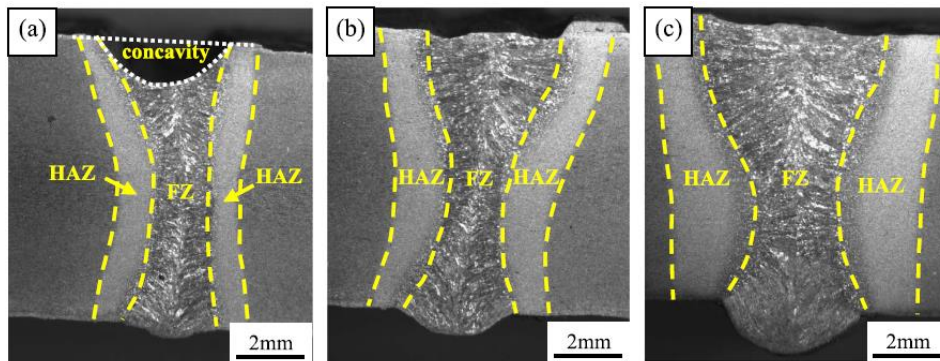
Macrographs of welds at different heat input in HLAW process a) 3.90 kJ/cm b) 5.20 kJ/cm c) 7.75 kJ/cm [66]
